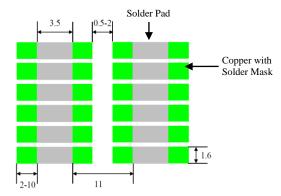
Top View of the Bottom Side of Surface Mount PCB Foot-print
